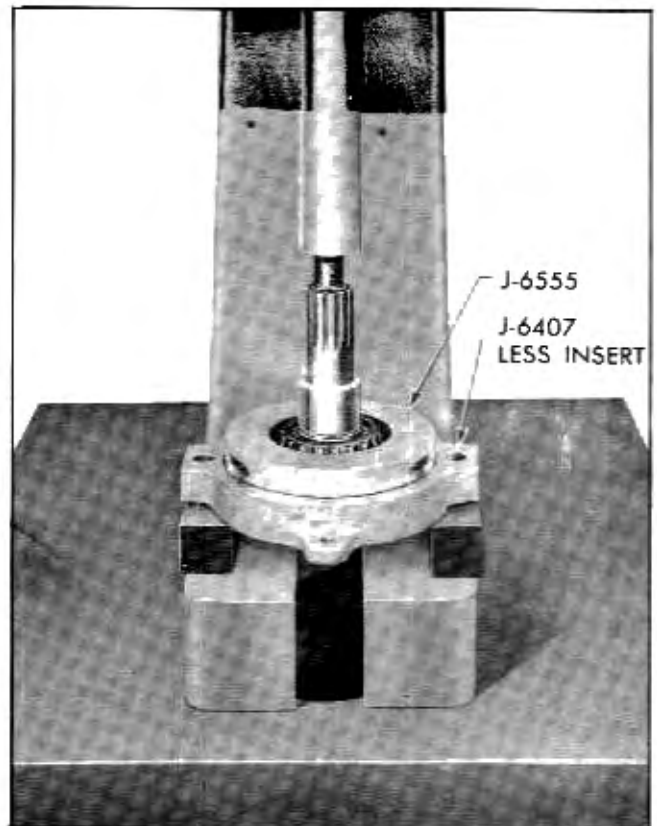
Removing Bearing With Remover J-6555 and Press Plate J-6407 Less Insert
